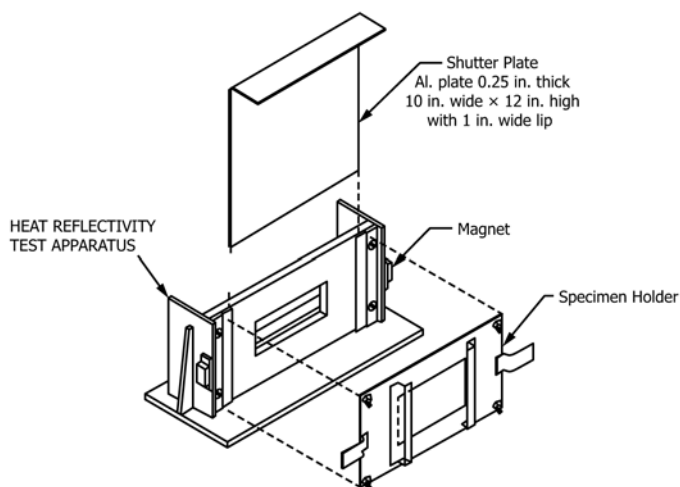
Detailed View of a Compliant Radiant Protective Performance Test Apparatus Showing Holder with Window, Manual Shutter Plate, and Specimen Holder with Calorimeter Brackets (A magnet/tab arrangement is shown as an equipment design option to hold the specimen holder to the assembly)
